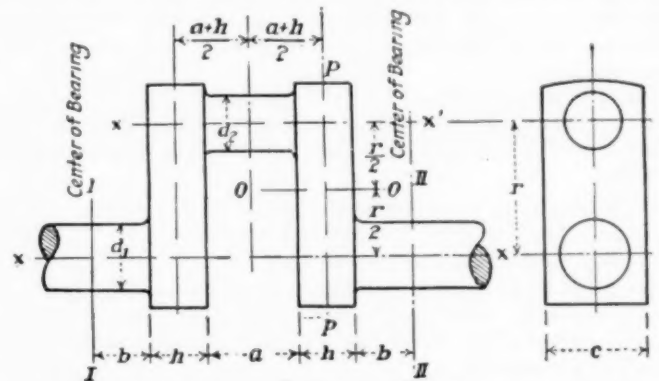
CONVENTIONAL TYPE OF SINGLE-CYLINDER, TWO-BEARING CRANKSHAFT
